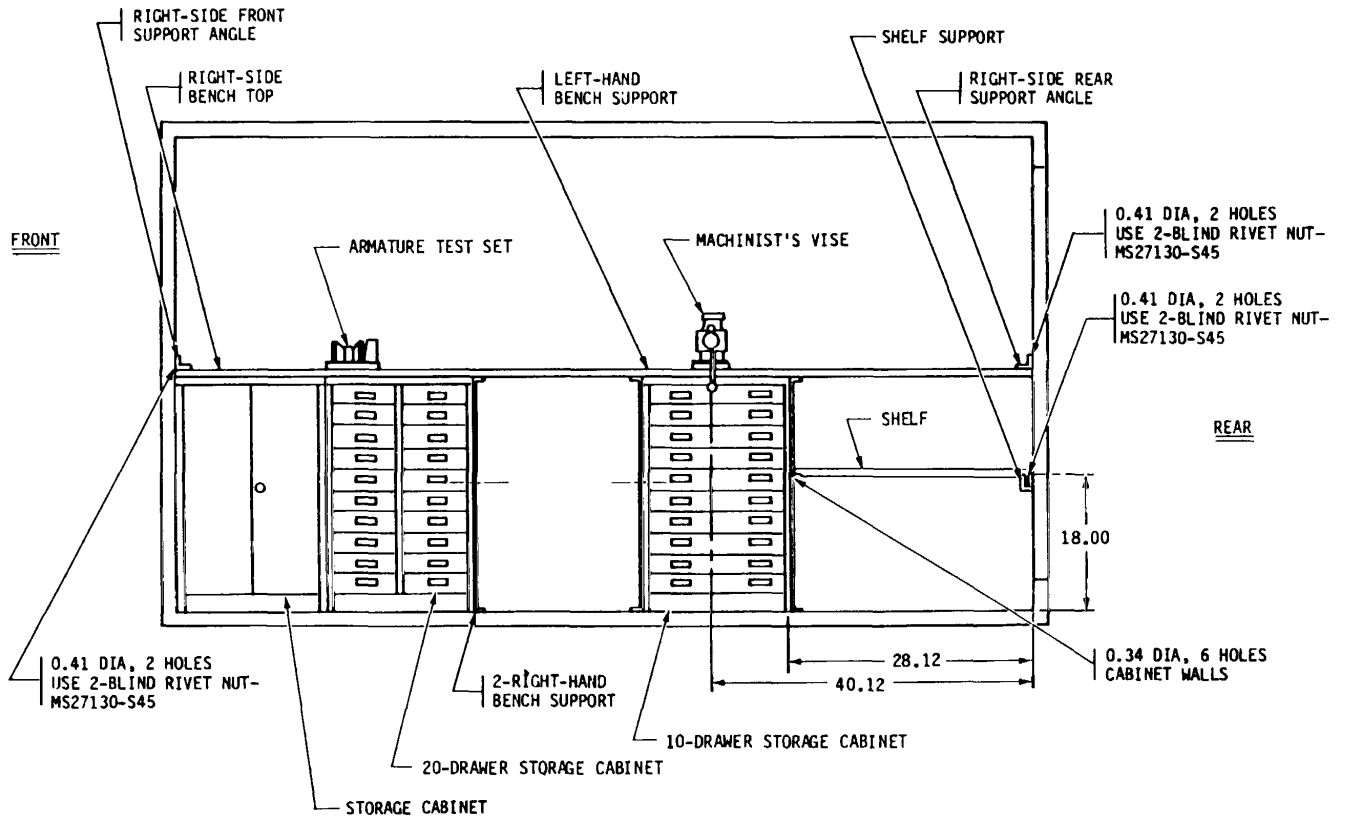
Components to be Mounted, Unit 1, 280, Right Side Elevation.
